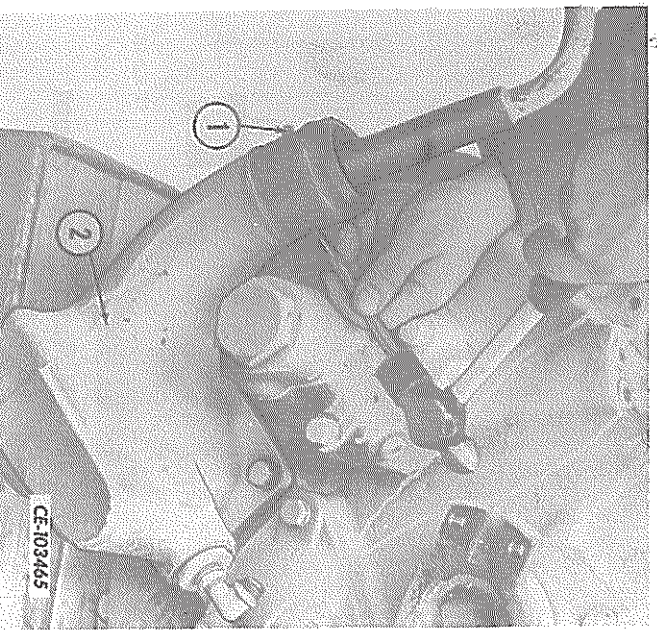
Removing the Shifter Housing Swivel Shaft
